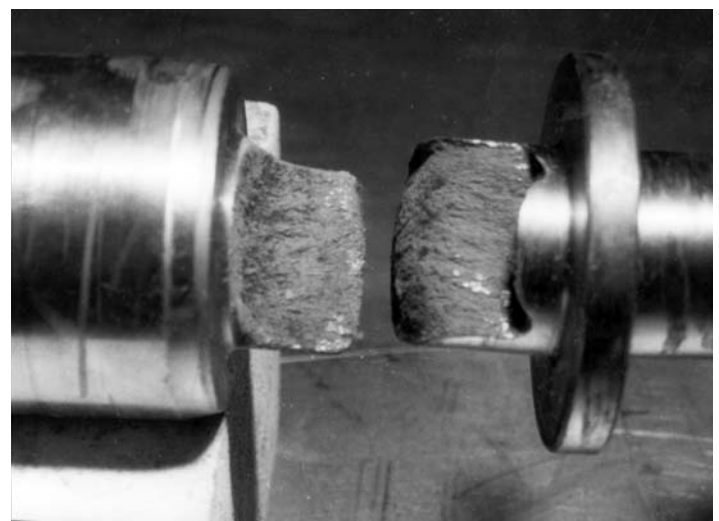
Close-up view of the fracture surface. The fracture features are typical of tensile/bending overloads.
